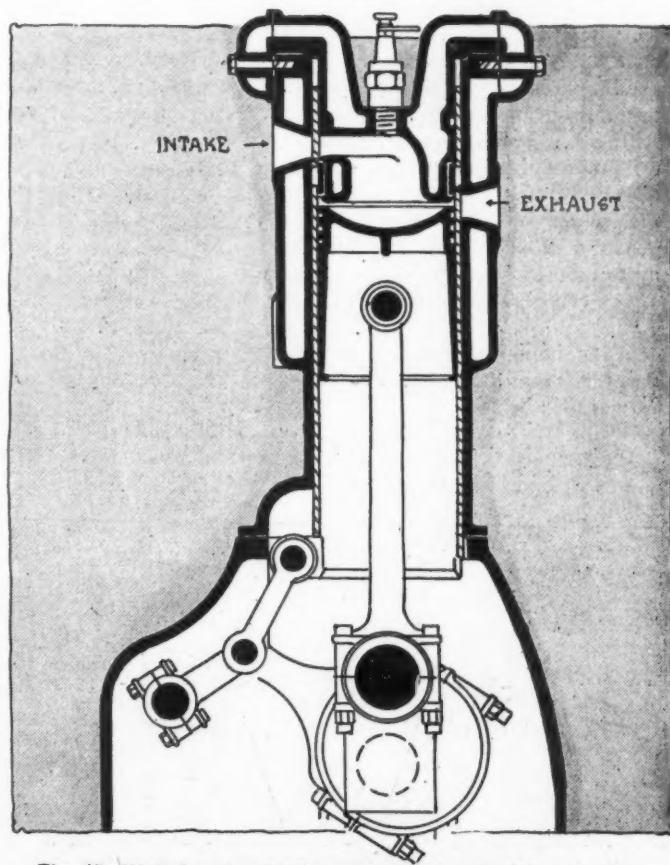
Wolseley sleeve-valve motor with eccentric actuating mechanism
